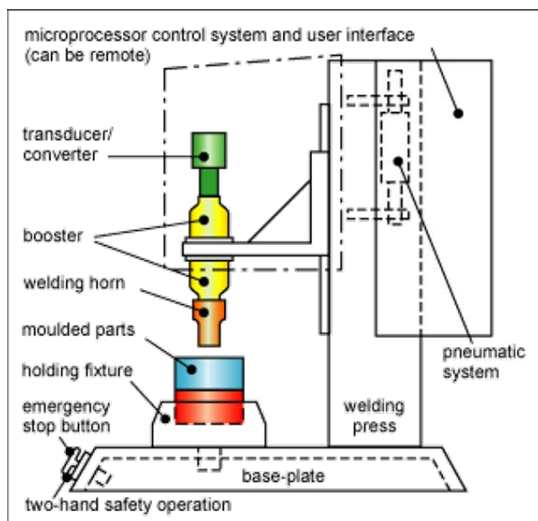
The principle behind the working of a ultrasonic welding machine[22]
